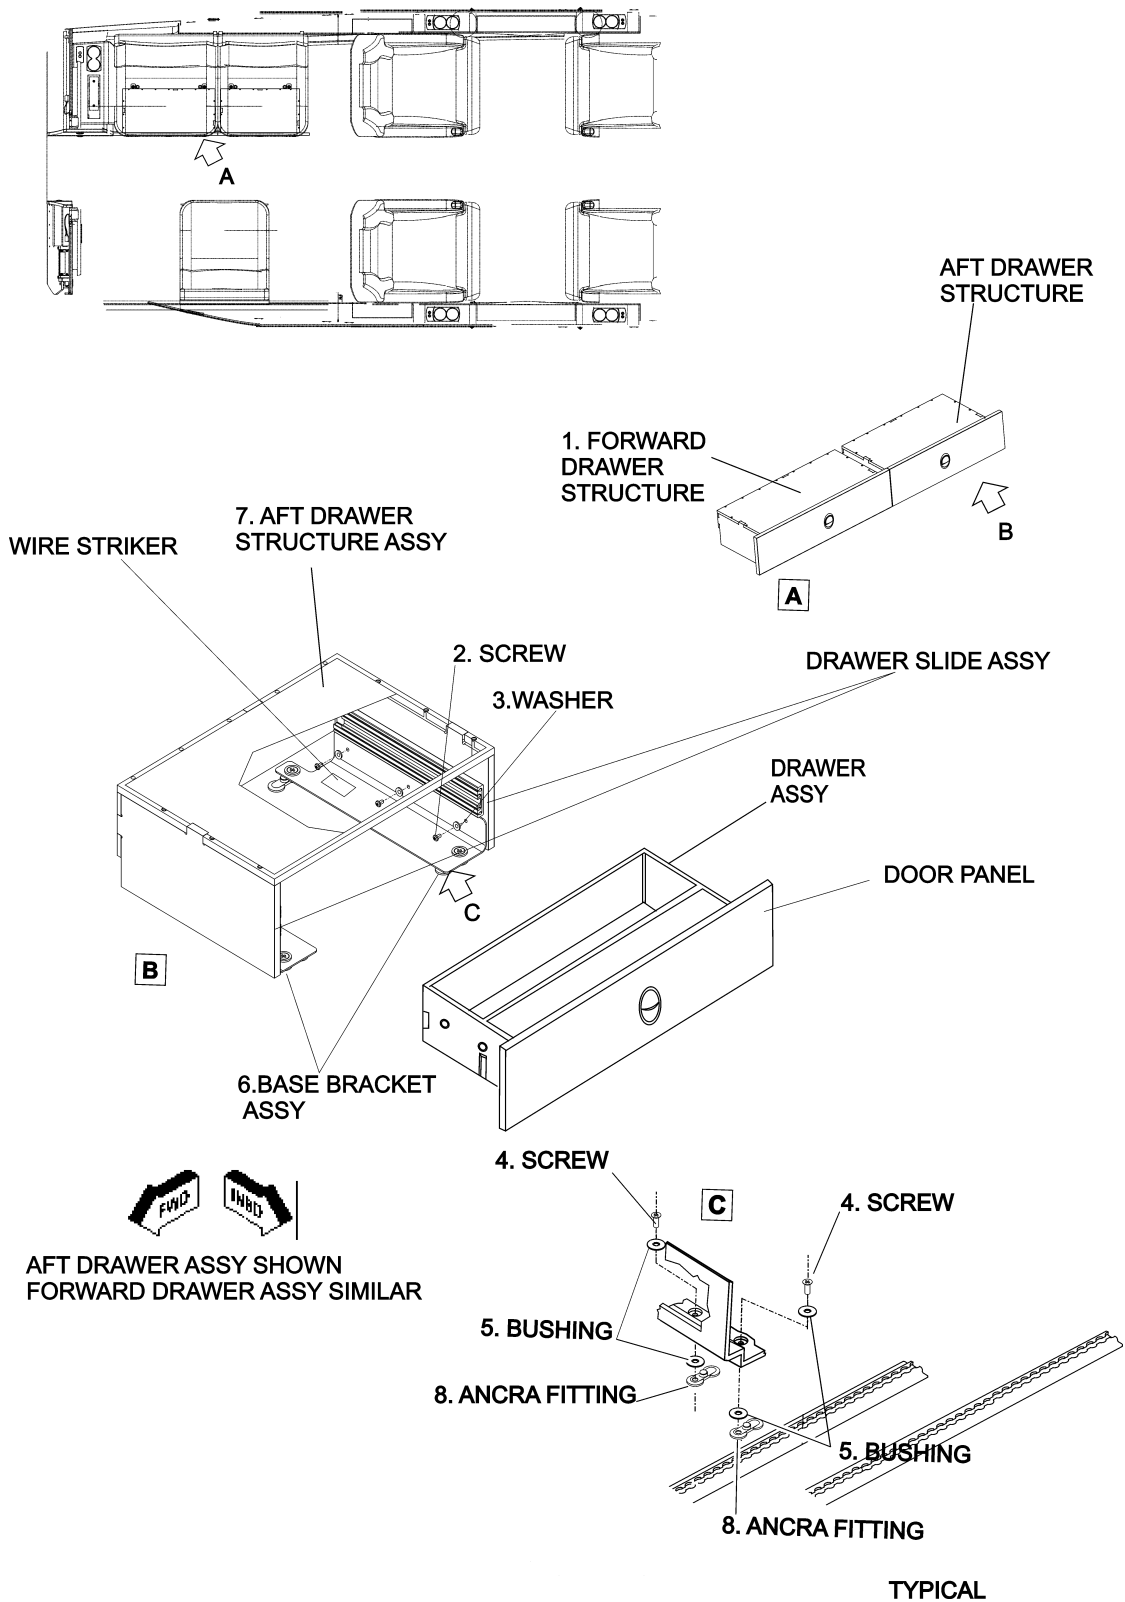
RH Hand Divan Floor Drawer - Removal/Installation
